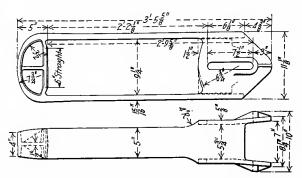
Cast Steel Draft Yoke for Use with Friction Draft Gear. Buckeye Steel Castings Company.
